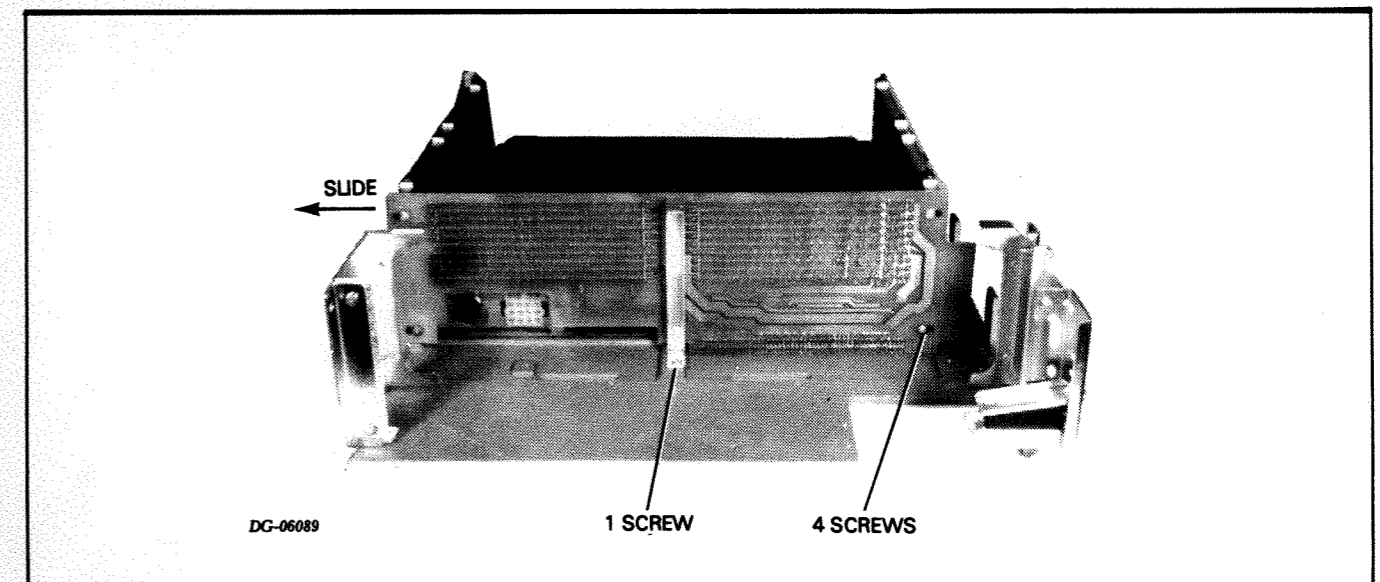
SLIDING BACKPANEL OUT OF 5-SLOT CHASSIS
